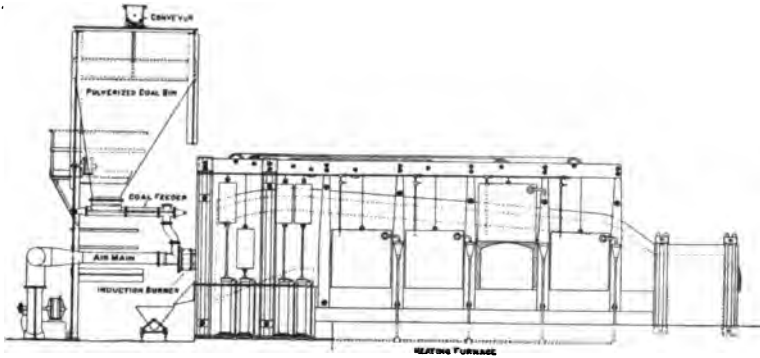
Heating furnace for forgings, Fuller-Lehigh system.
